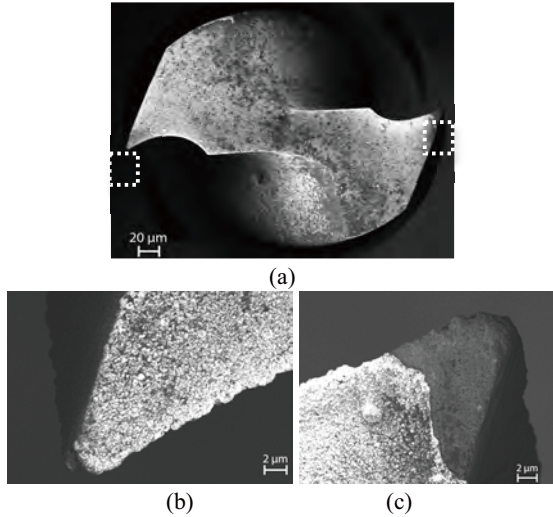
SEM images of CII + NCD coated end mill after 250 mm of linear milling: (a) end mill, (b) left and (c) right cutting edges.
